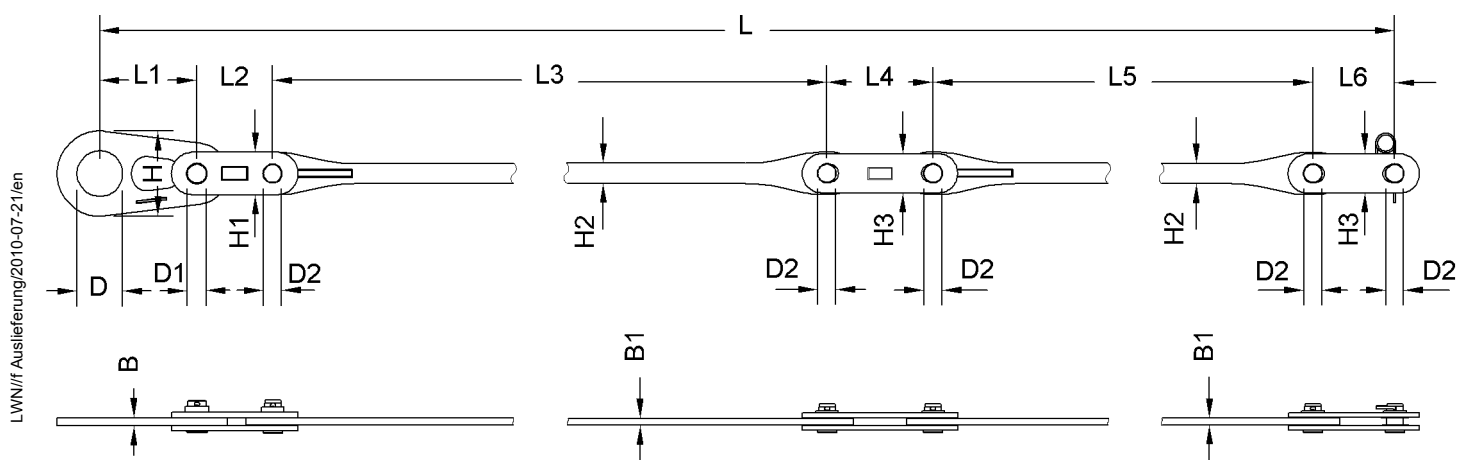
Dimensions of jib pendant strap on 2316 jib head section
